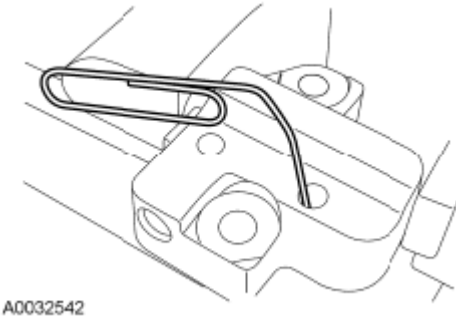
Installing Paper Clip Into Hole In Tensioner Housing
